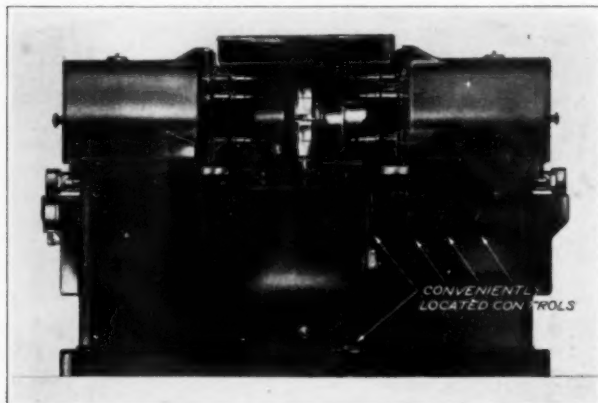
HORIZONTAL DUPLEX SEMI-AUTOMATIC DRILLING MACHINE, FRONT VIEW
